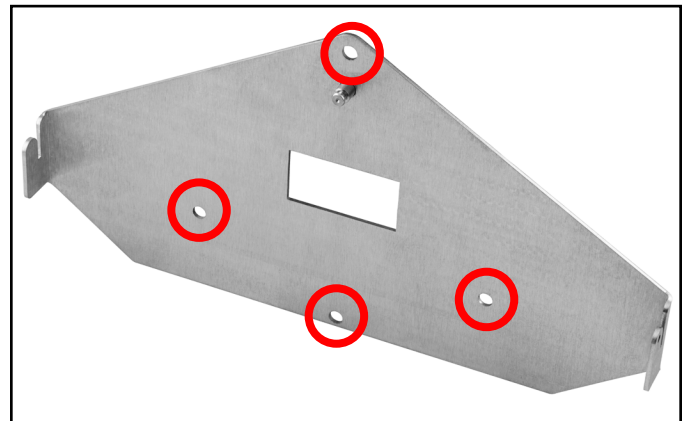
Mounting holes on the Combo Tester X3+ mounting bracket
